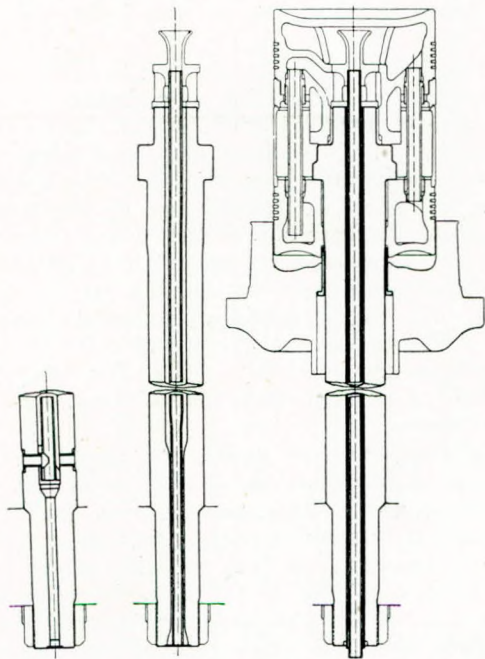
Piston rod development of the double-acting two-stroke M.A.N. engine.
